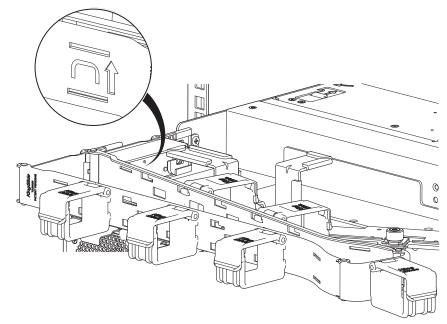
Attachment of the CMA C bracket assembly to the CMA A bracket on the chassis
